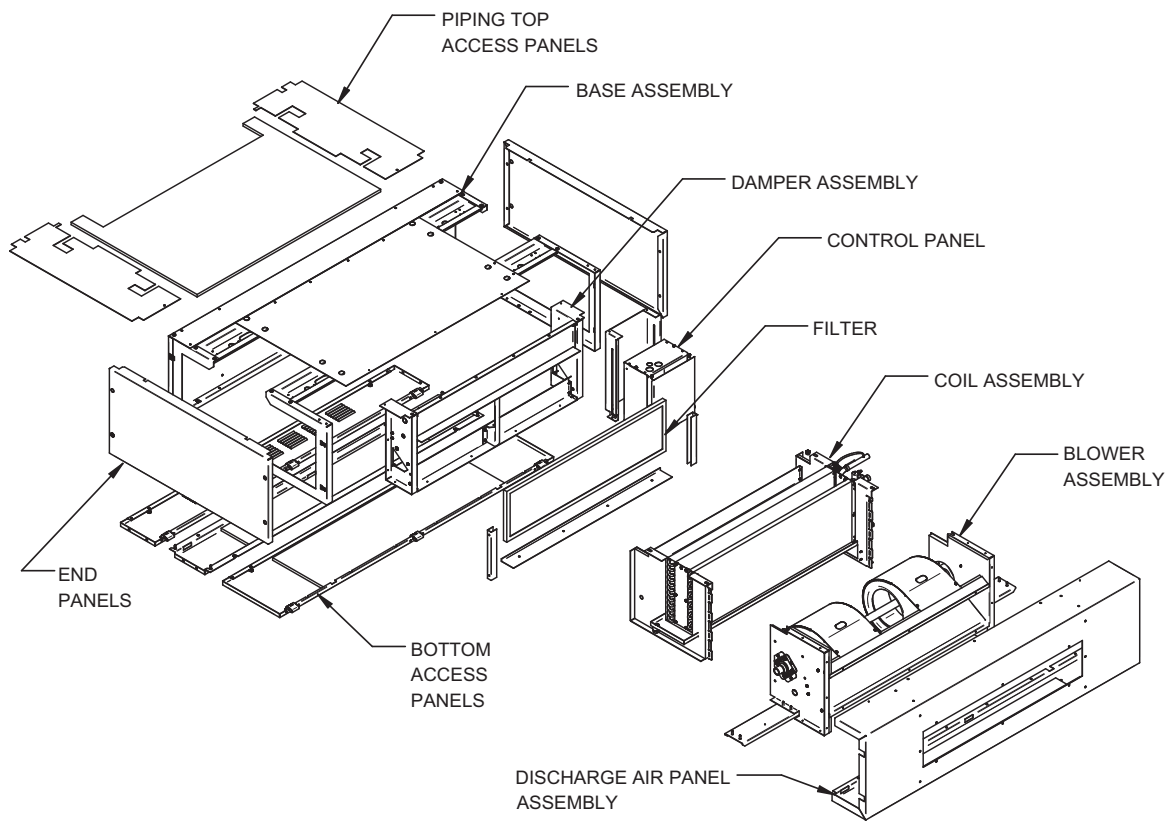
Component Layout Ceiling Mounted Units (Exploded View)
